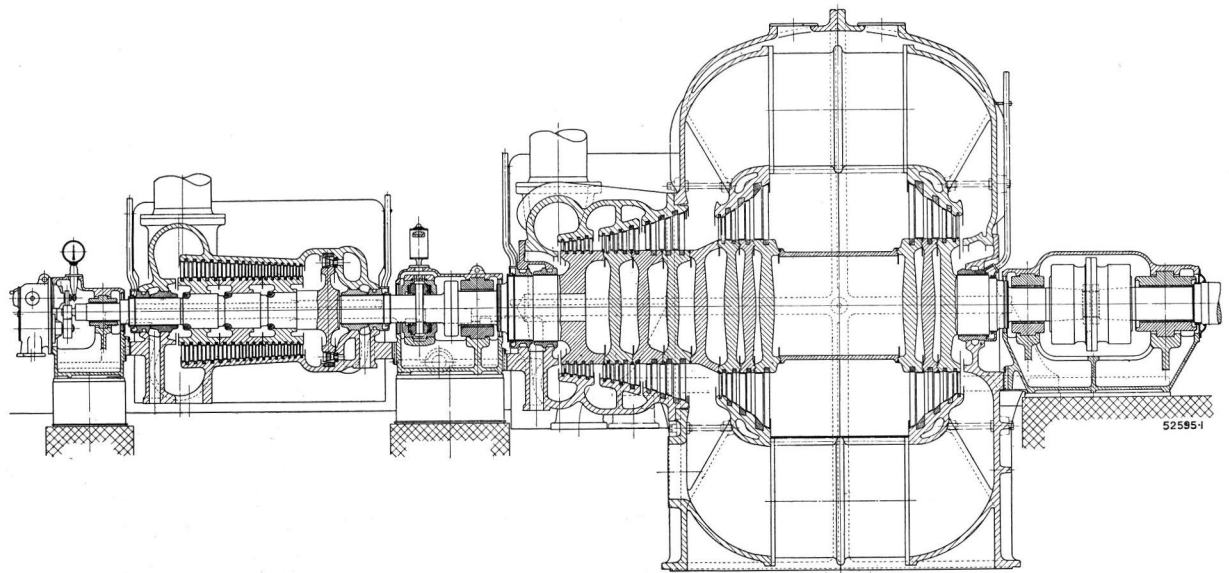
Two-cylinder turbine with double-ended exhaust, for 40/50,000 kW at 3000 r. p. m.
